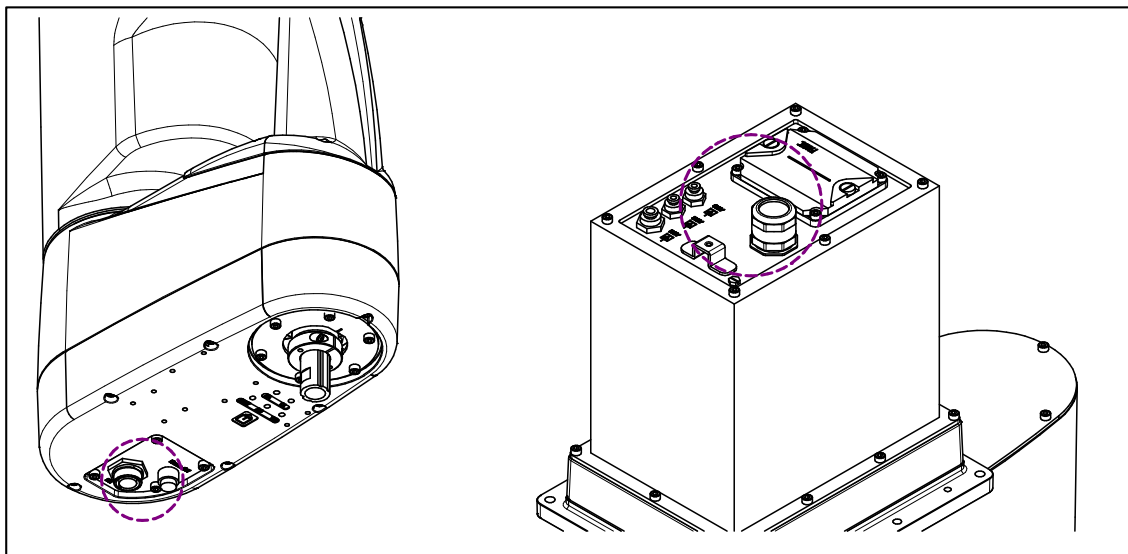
(a) Cable clamp and connector inspection points
